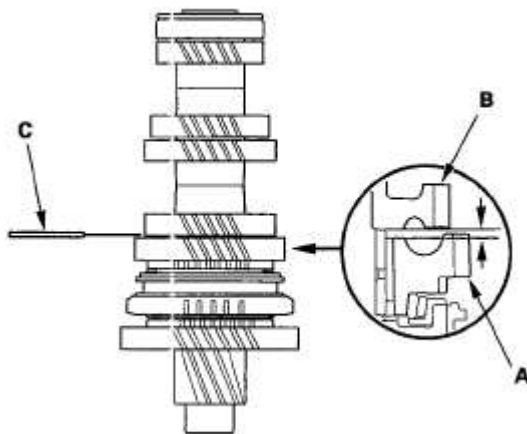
Identifying 1st Gear, Distance Collar And Feeler Gauge
